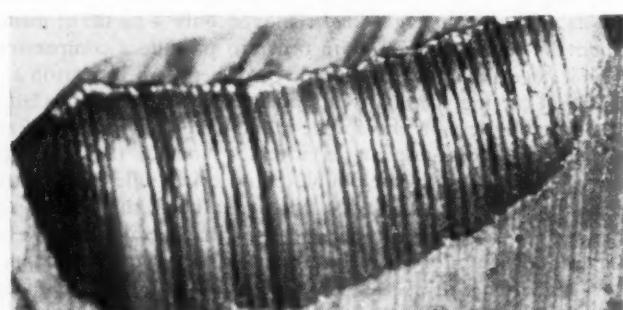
CUTTING TIP AT END OF TEST AT 2650 FPM
